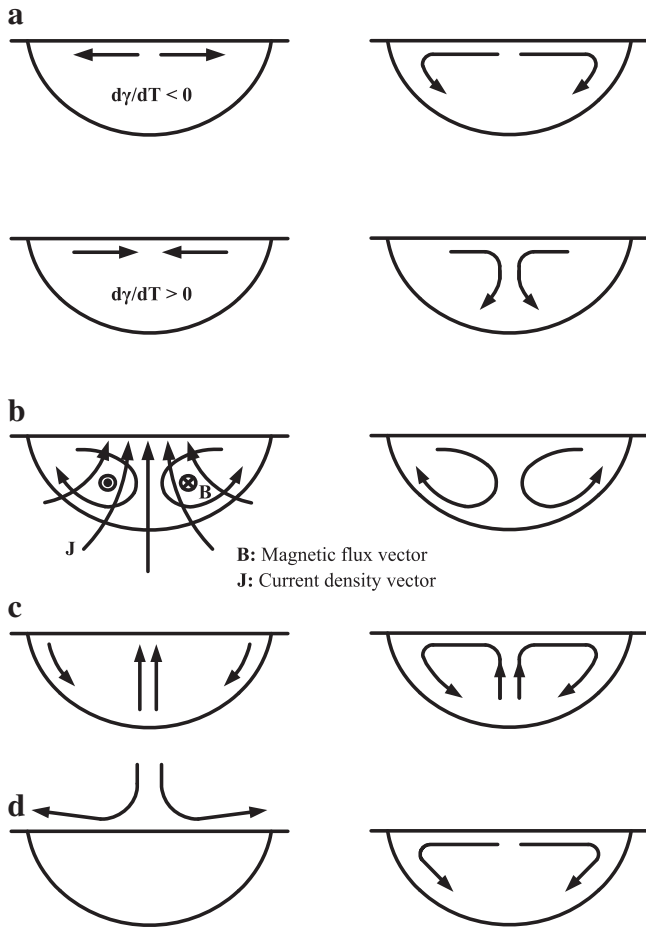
Driving forces for fluid flow in molten weld pool.
